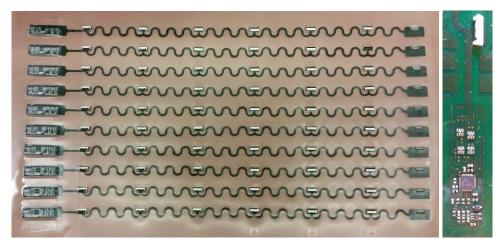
TPVision demonstrators assembled at Page Electronics using conventional assembly machines
